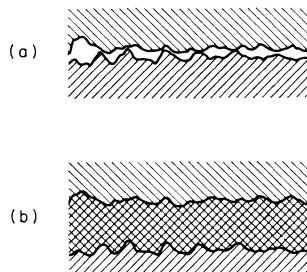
Schematic cross section through a flange joint: (a) without gasket; (b) with inserted gasket
